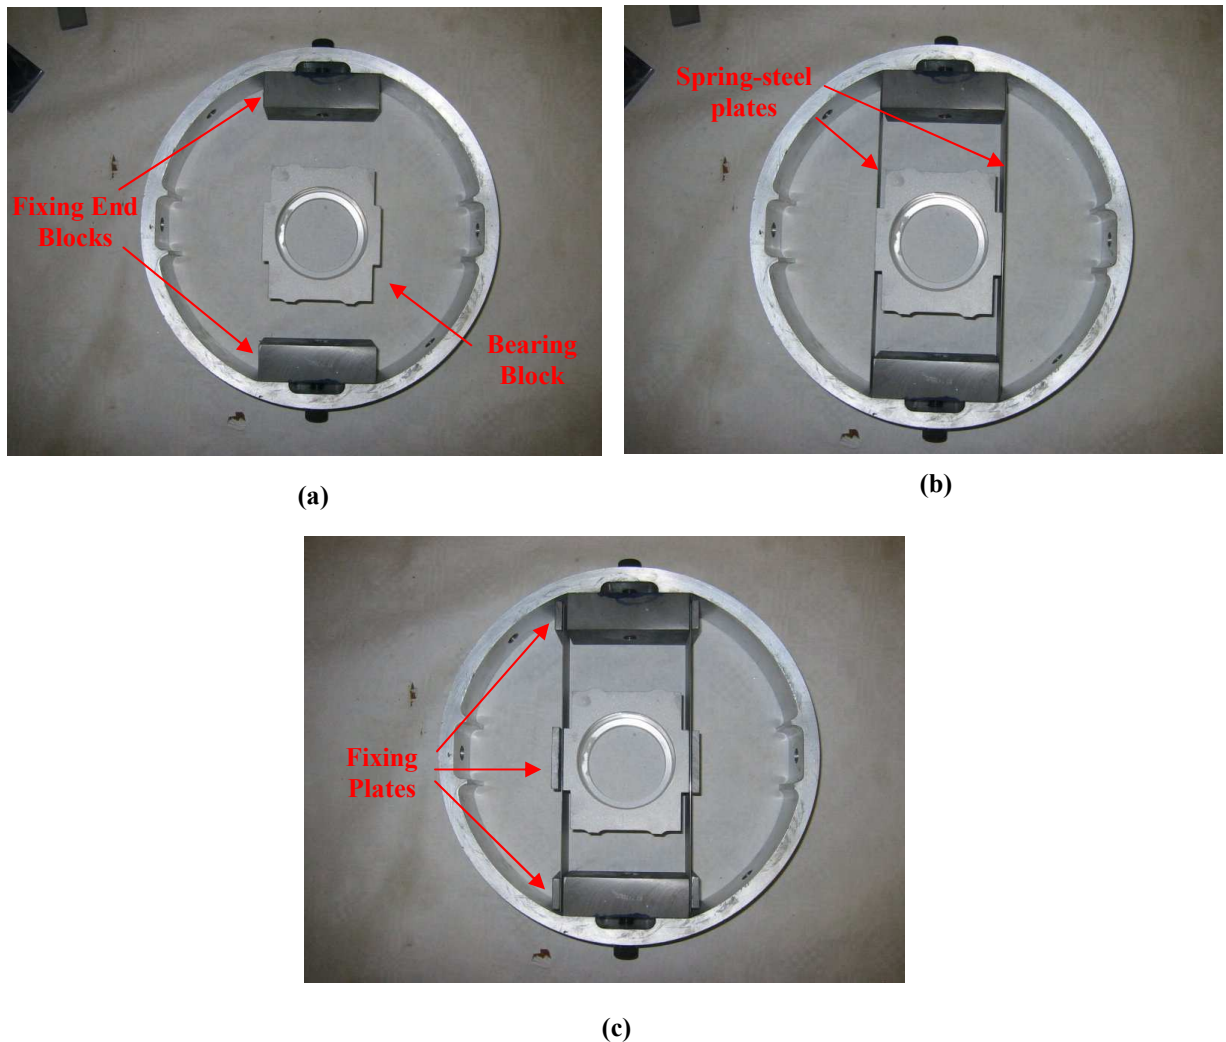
3 Step-by-step assembly of the nonlinear bearing support
